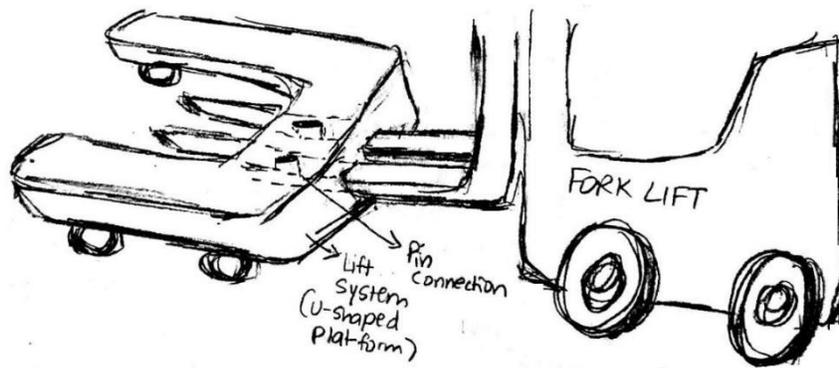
Hydraulic Cylinder Lift and Hole/Pin Locking System
